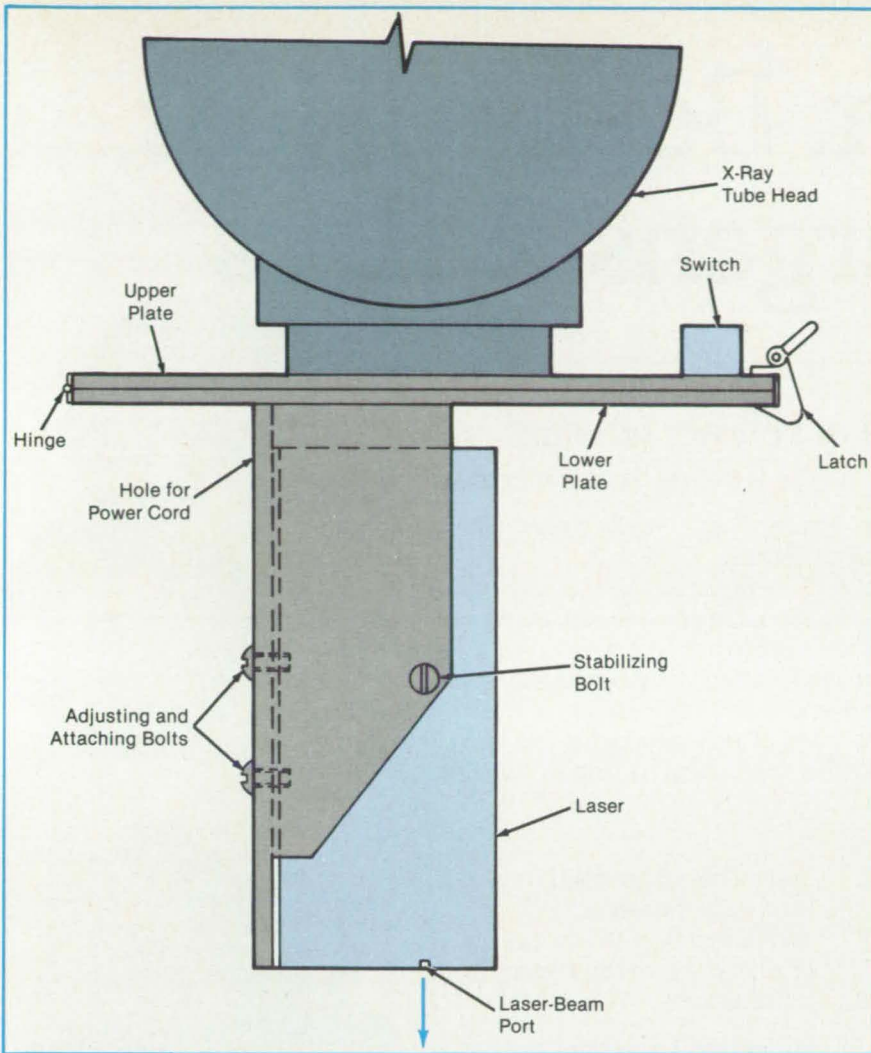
The Lower Plate and Laser Clamp are made of aluminum pieces welded together.
